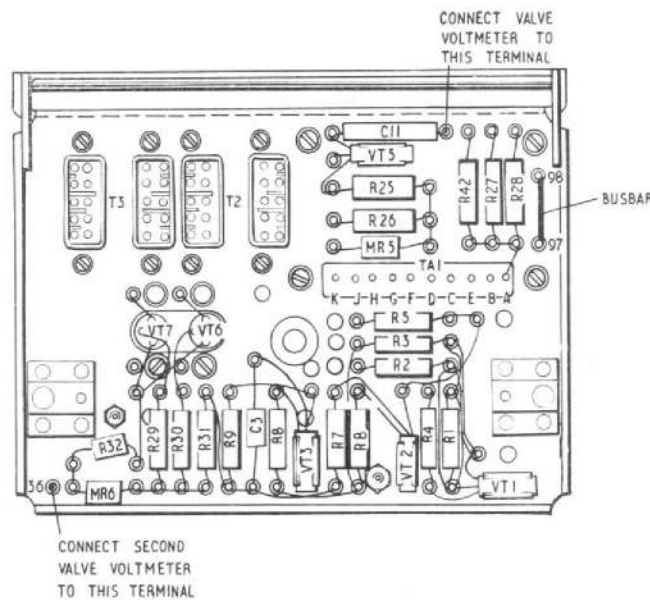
Rear of chassis assembly — valve voltmeter connecting points
